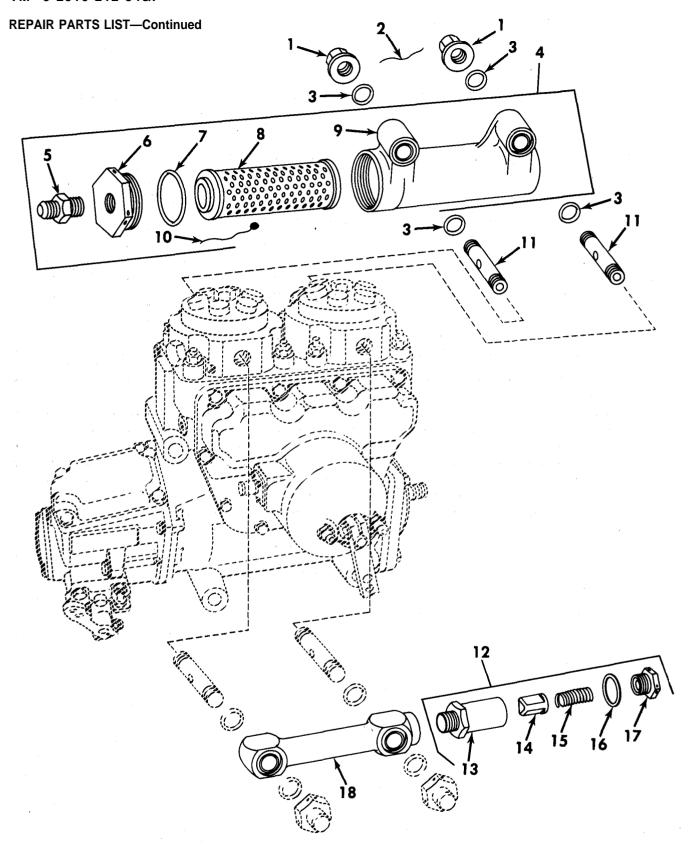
Filter Assembly, Bleeder Valve Assembly, and Associated Parts.
